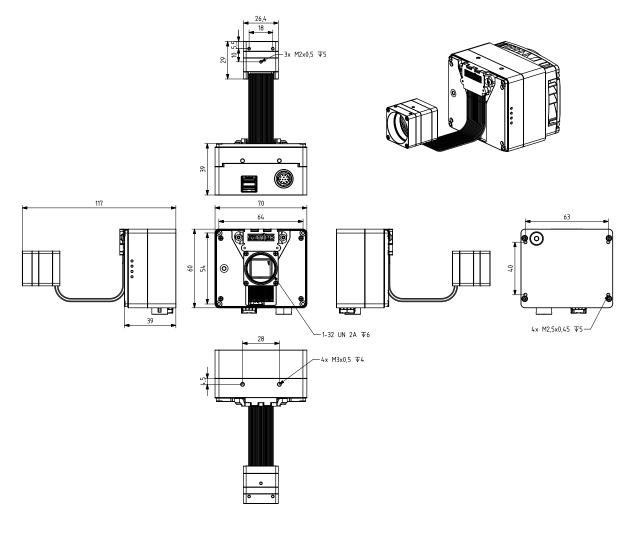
dimensional drawing camera with detached sensor sub-assembly
